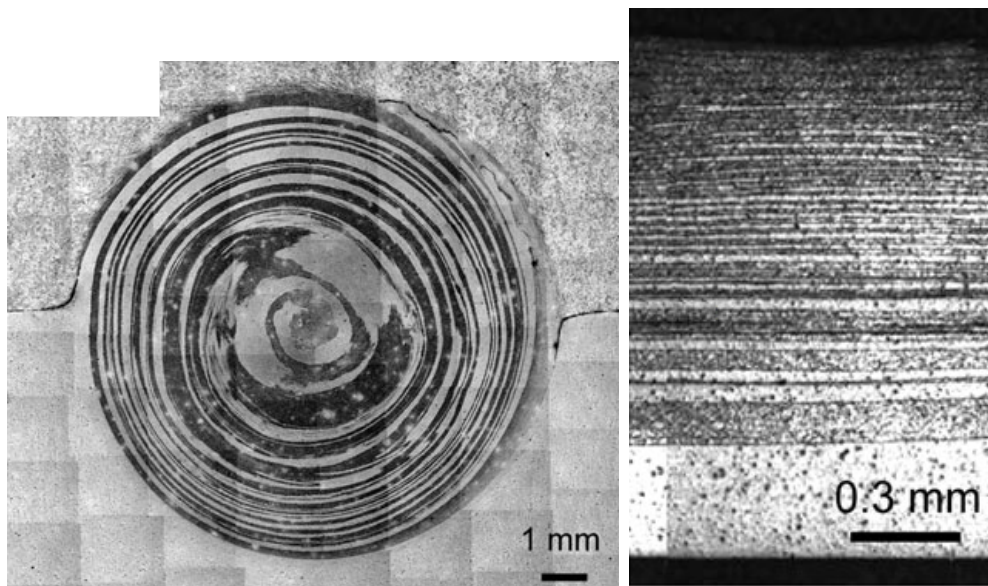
Left: Top surface view of the contact patch, post-weld, showing a typical onion-ring pattern, and right: Section view through a weld, showing layering between AA6082 and 6111
